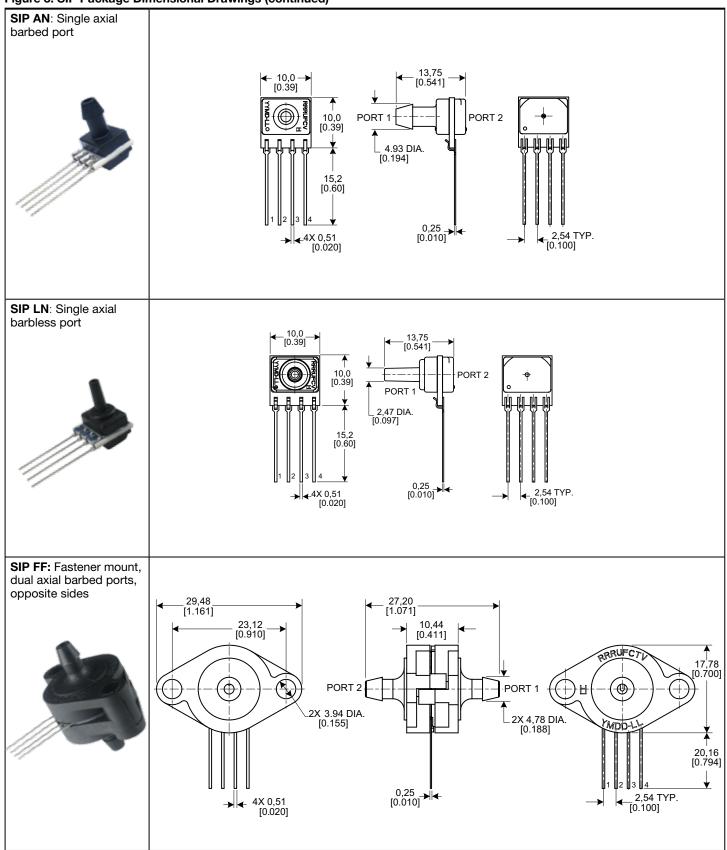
SIP Package Dimensional Drawings (For reference only: mm [in].)
